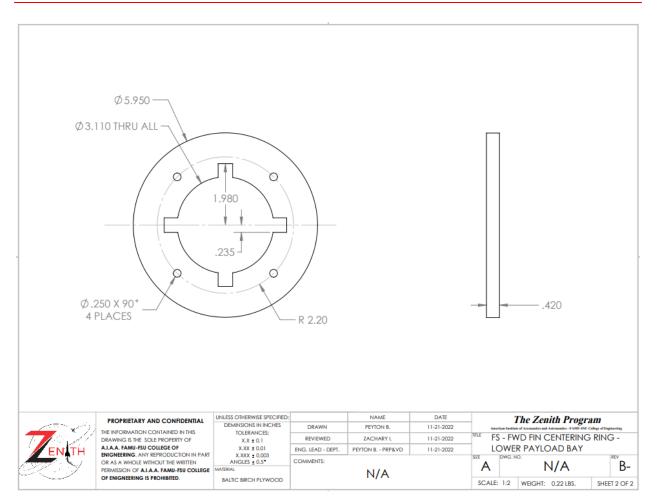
Forward Fin Centering Ring CAD Drawing
